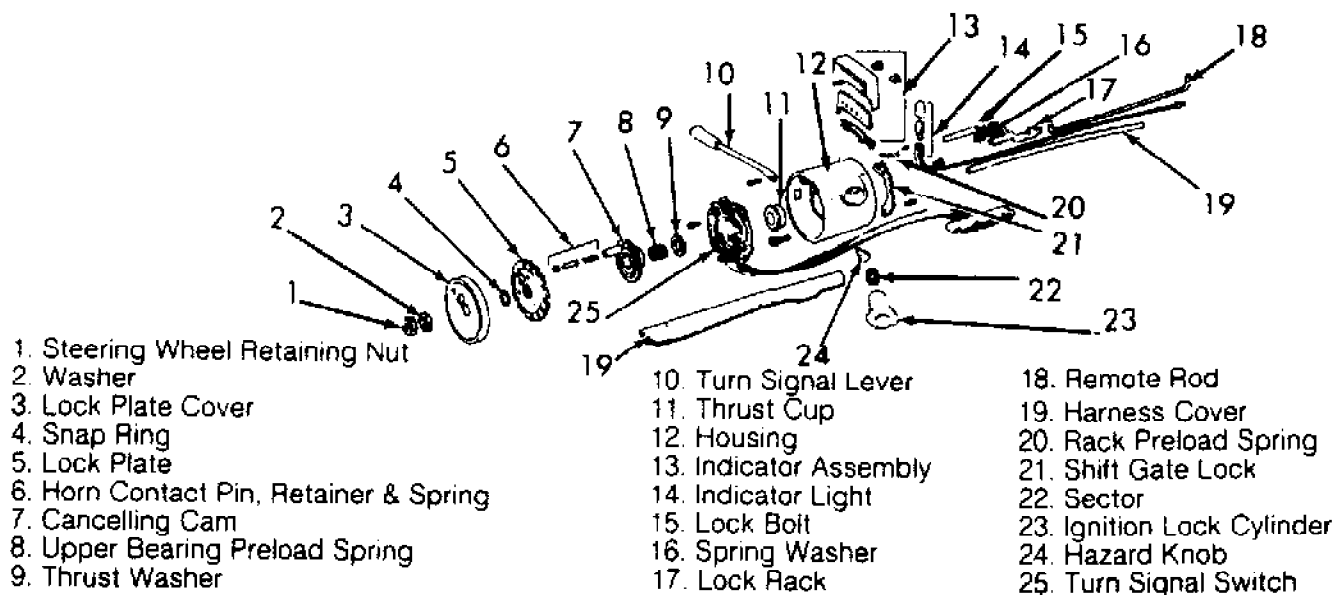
Exploded View of Jeep Steering Column Switch Assemblies
